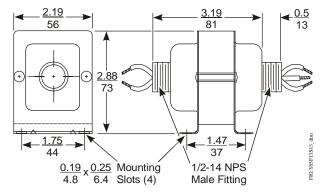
Dimensions for Y65F13 and Y65S13 Types, in./mm
